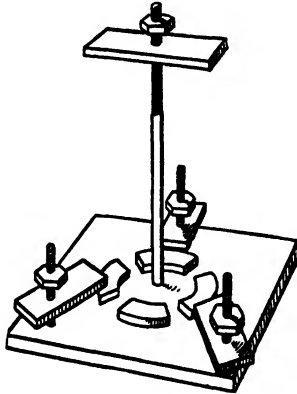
Jig for fillet welding flanges on to pipes
